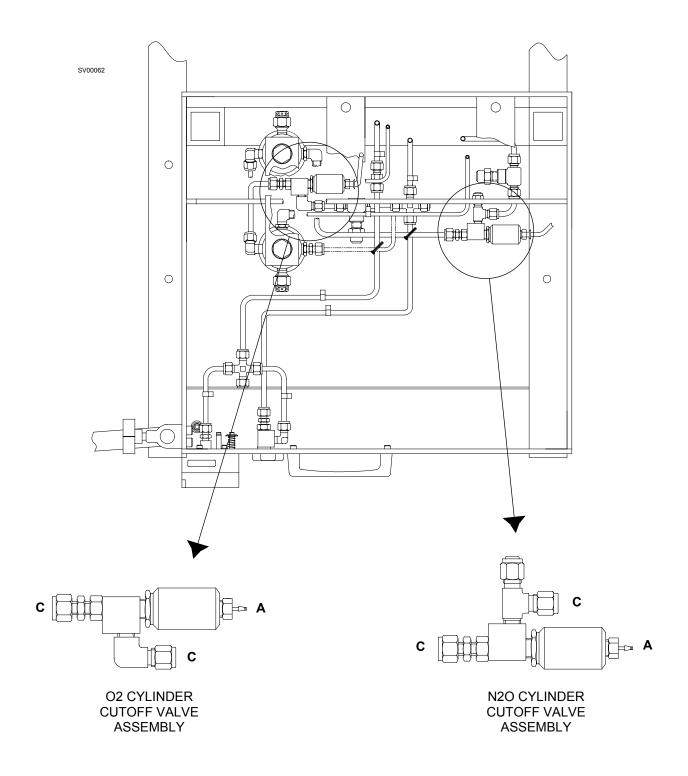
Cylinder Cutoff Valves (Canada)
